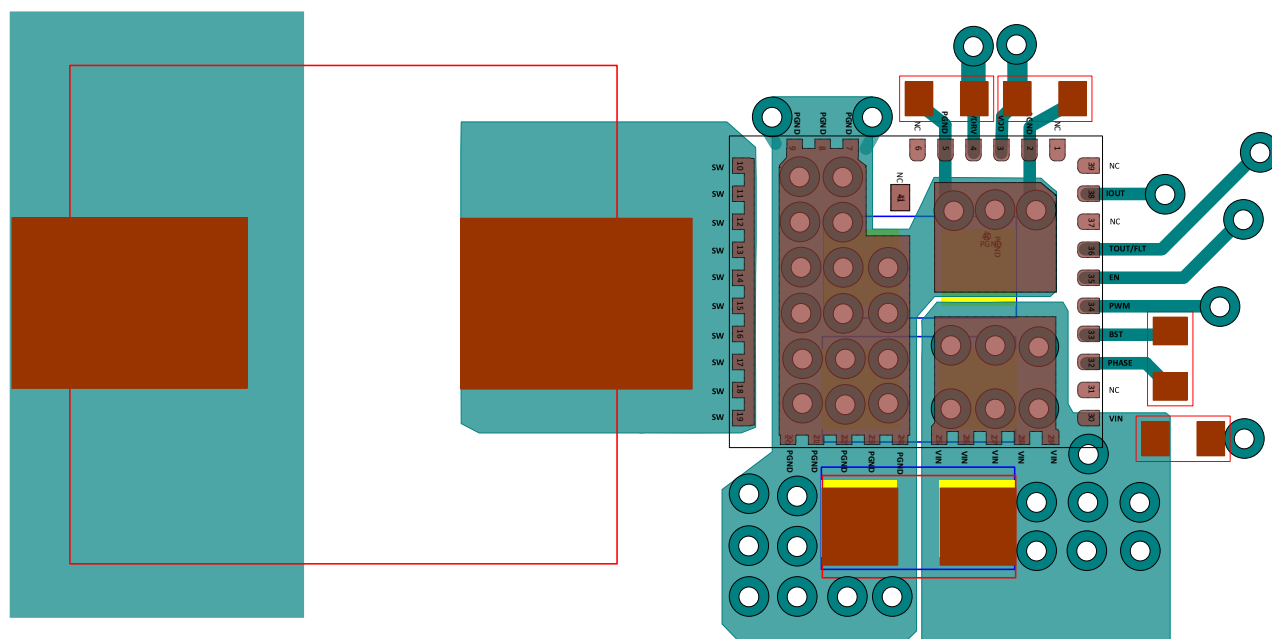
Recommended PCB Layout (Placement and Top Layer PCB)
